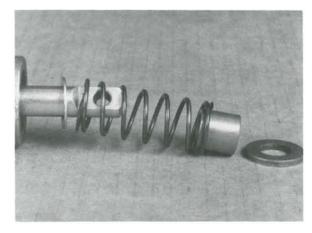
Slide the washer, spacer, spring and retainer onto the spool.
